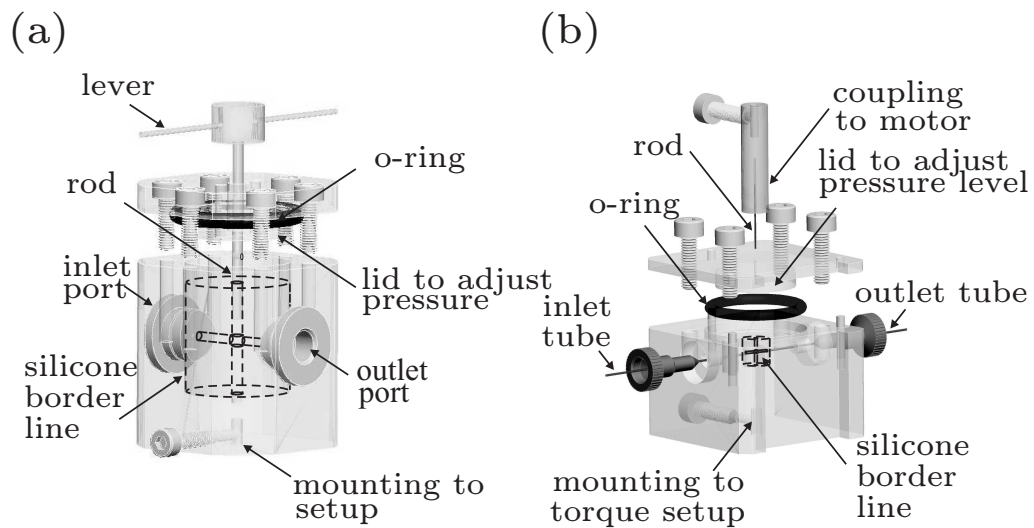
3D drawings of molded turning valves. The silicone plug is indicated with a dashed line. (a) Large valve. Parameters for silicone plug: outer diameter 20 mm, height 23 mm. (b) Small valve. Parameters for silicone plug: outer diameter 5 mm, height 6 mm. On the figure is also seen a coupling to motor, which enables high-speed torque measurements the motor based torque setup. However, the coupling can be substituted with a lever, which also enables measurements with the balance based torque setup. Both torque setups are described in Chapter 5.
